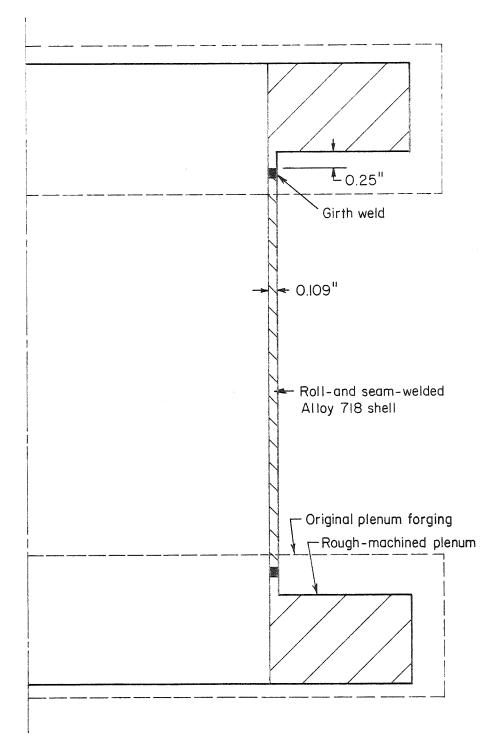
DIAGRAM OF TECHNIQUE USED FOR FABRICATING SHELL AND PLENUM STRUCTURE FOR SPOOLPIECE 2
